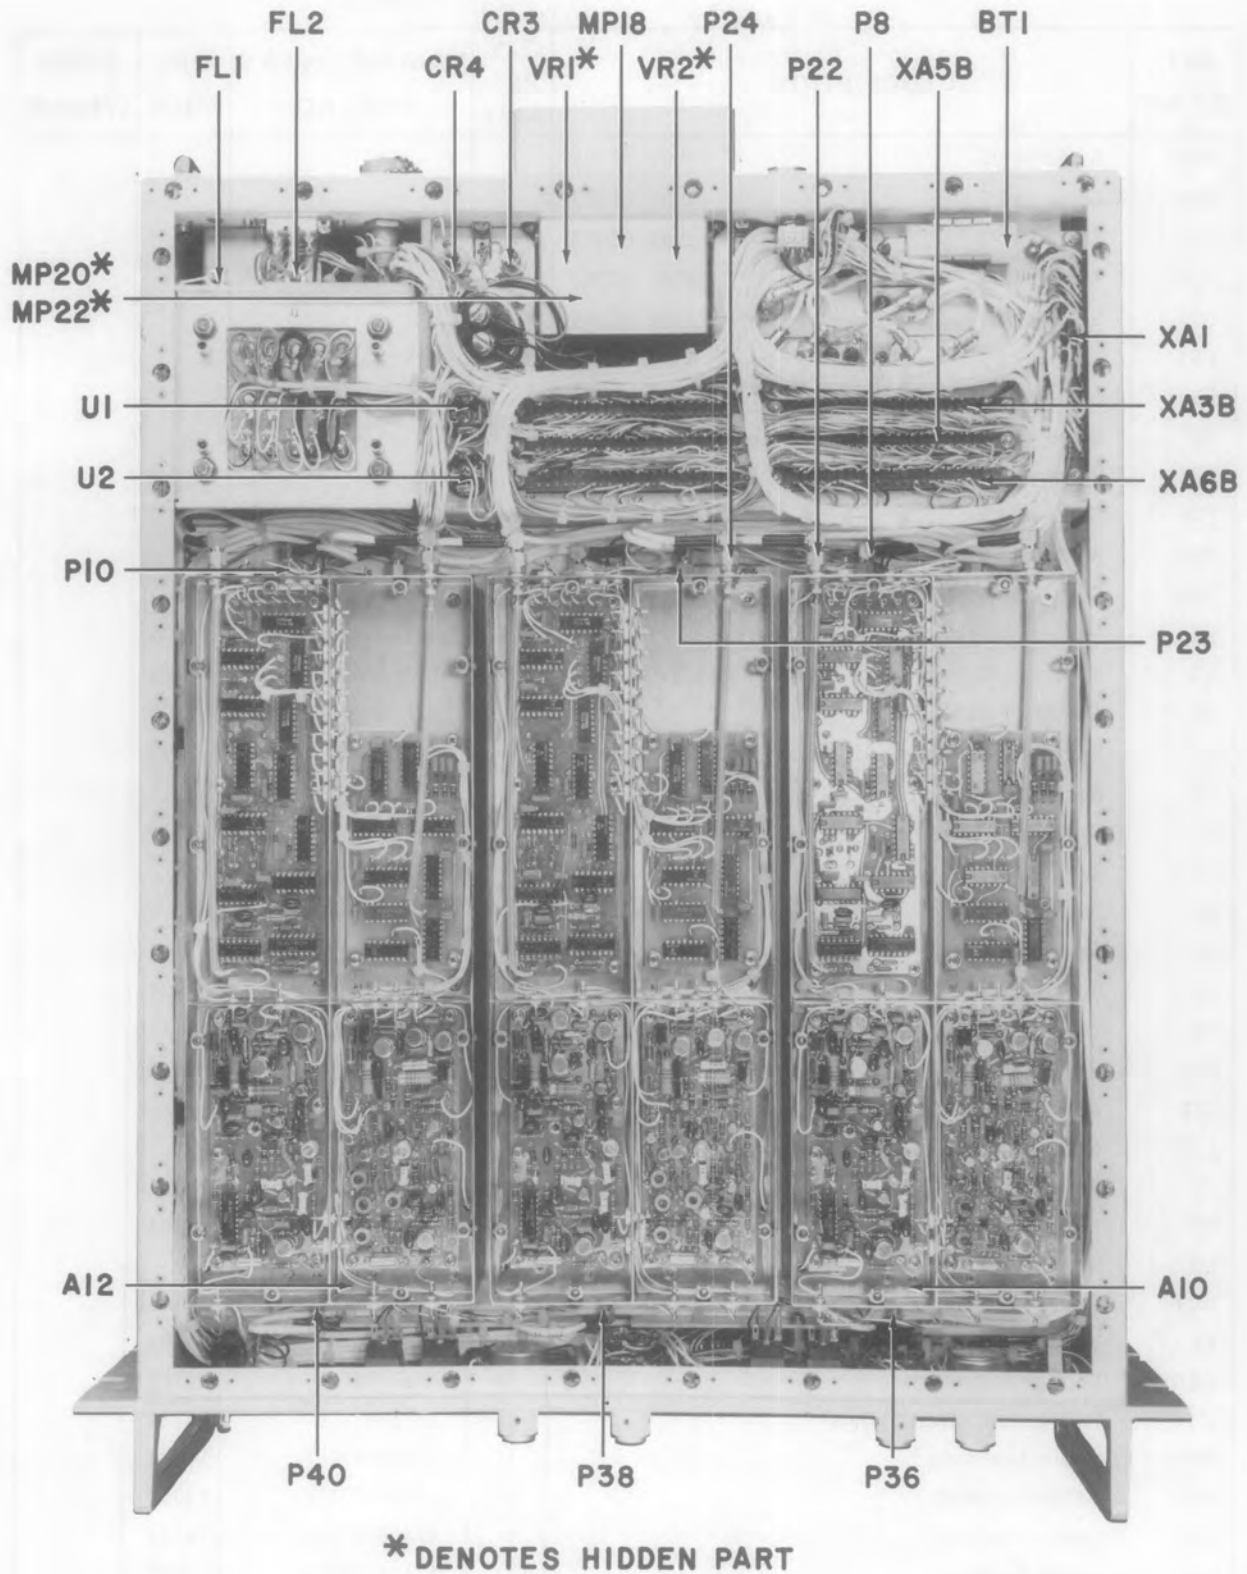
Type WJ-9518/9518E, Bottom View, Location of Components
